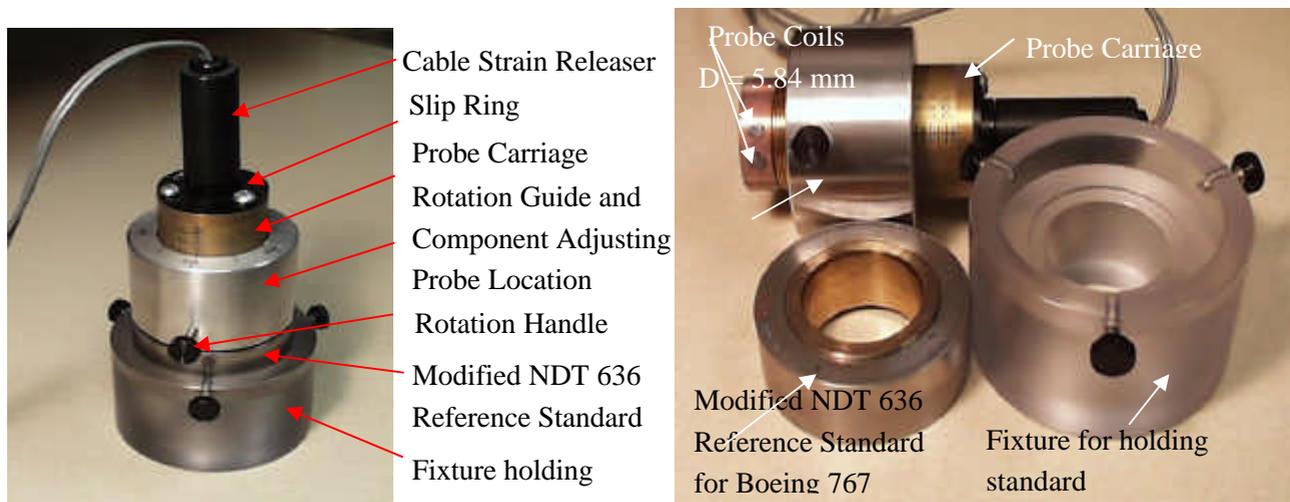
An FG RFEC probe for detecting cross-bolt hole cracks under bushing
